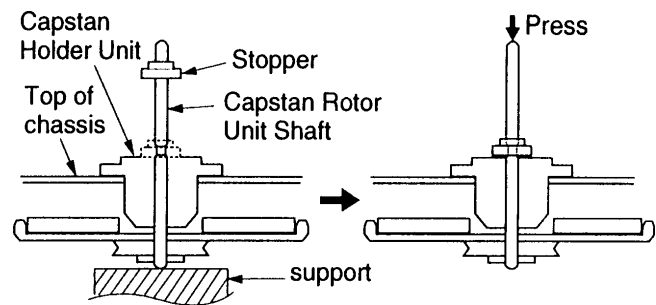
Capstan Rotor Unit/Capstan Holder Unit/SS Brake Arm Unit Removal
